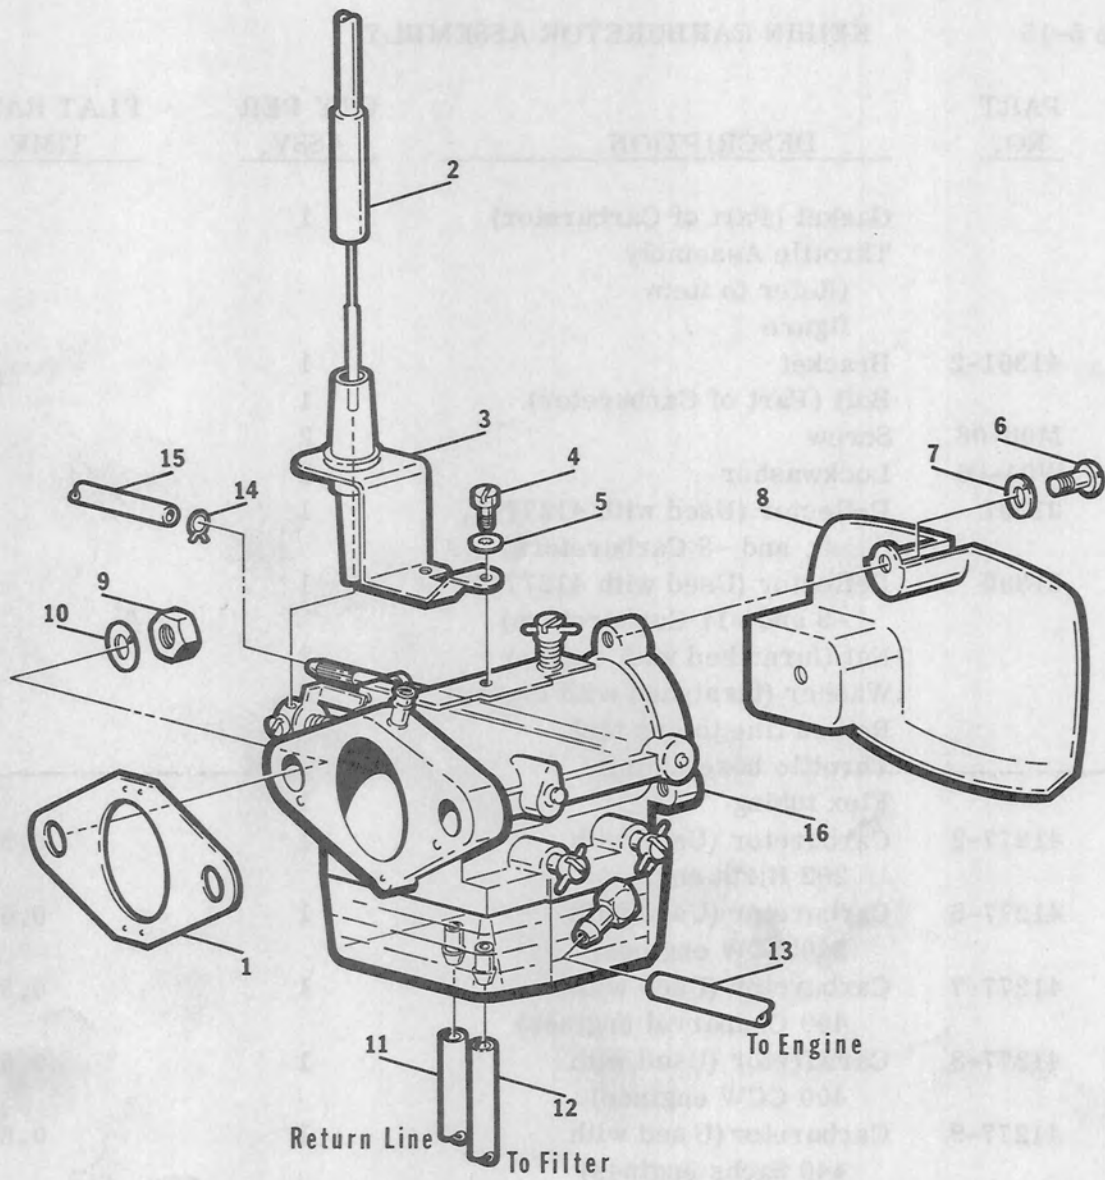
WALBRO CARBURETOR ASSEMBLY
